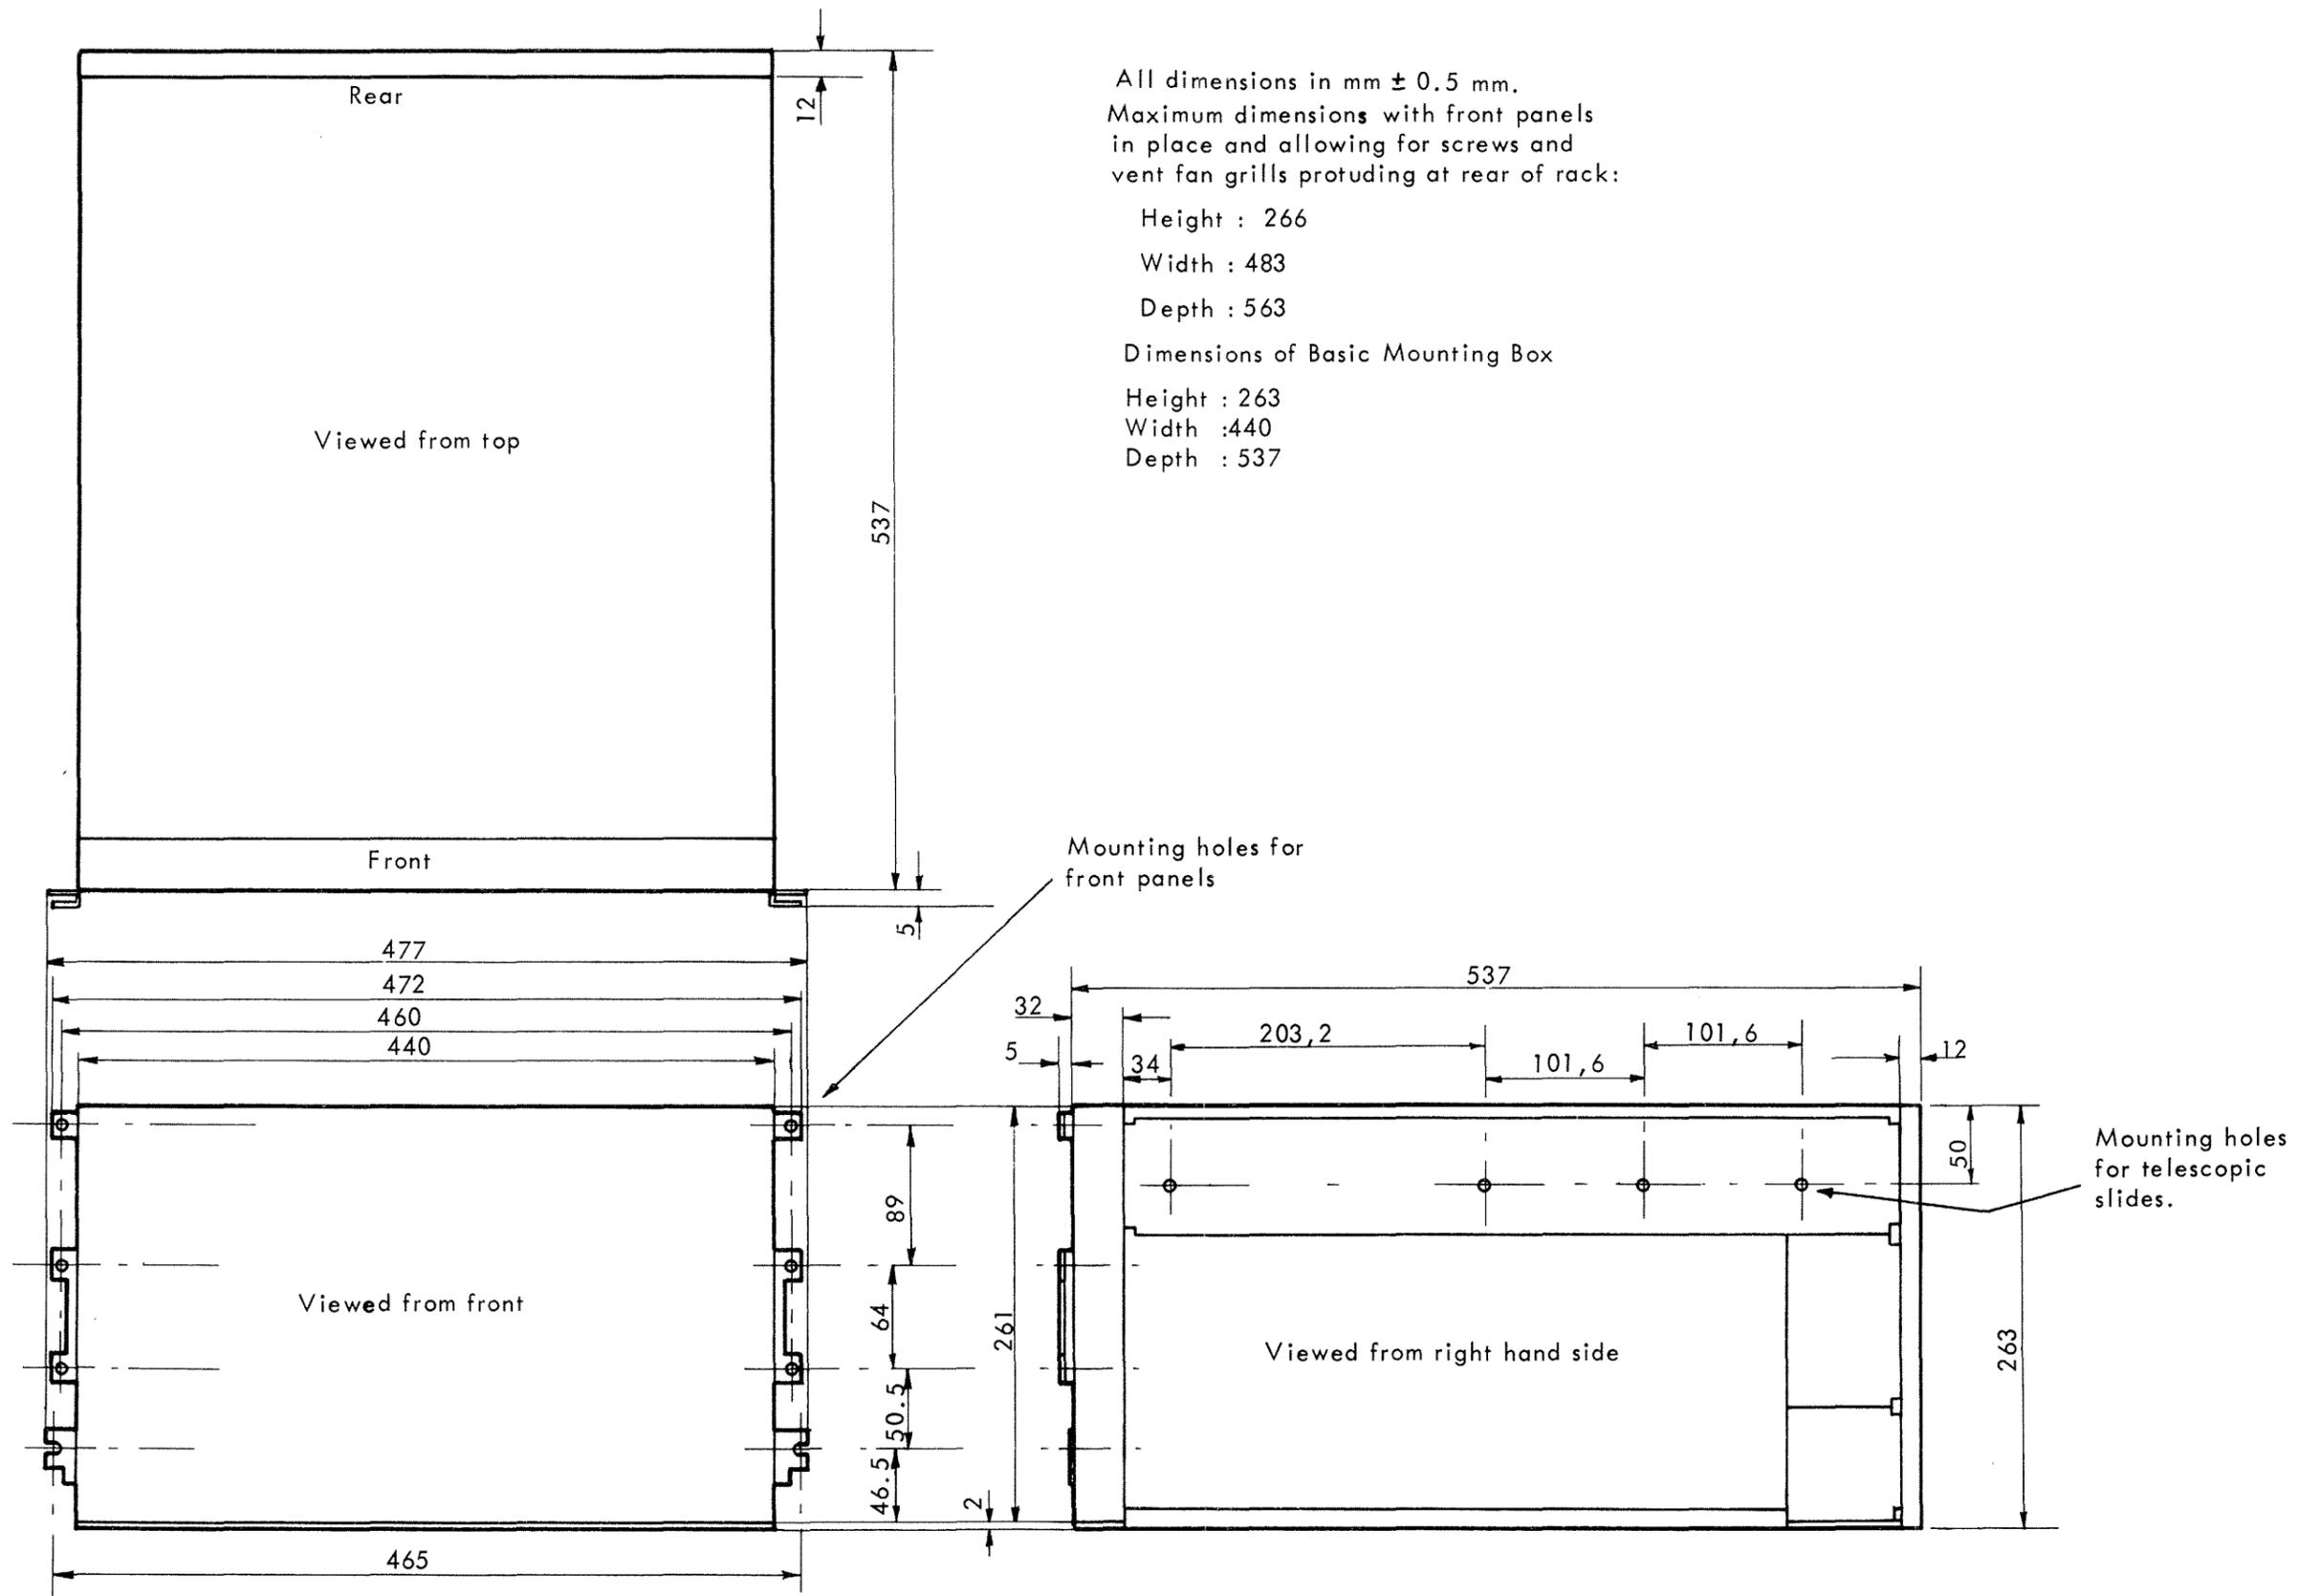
OUTLINE DRAWING OF M4R RACK
